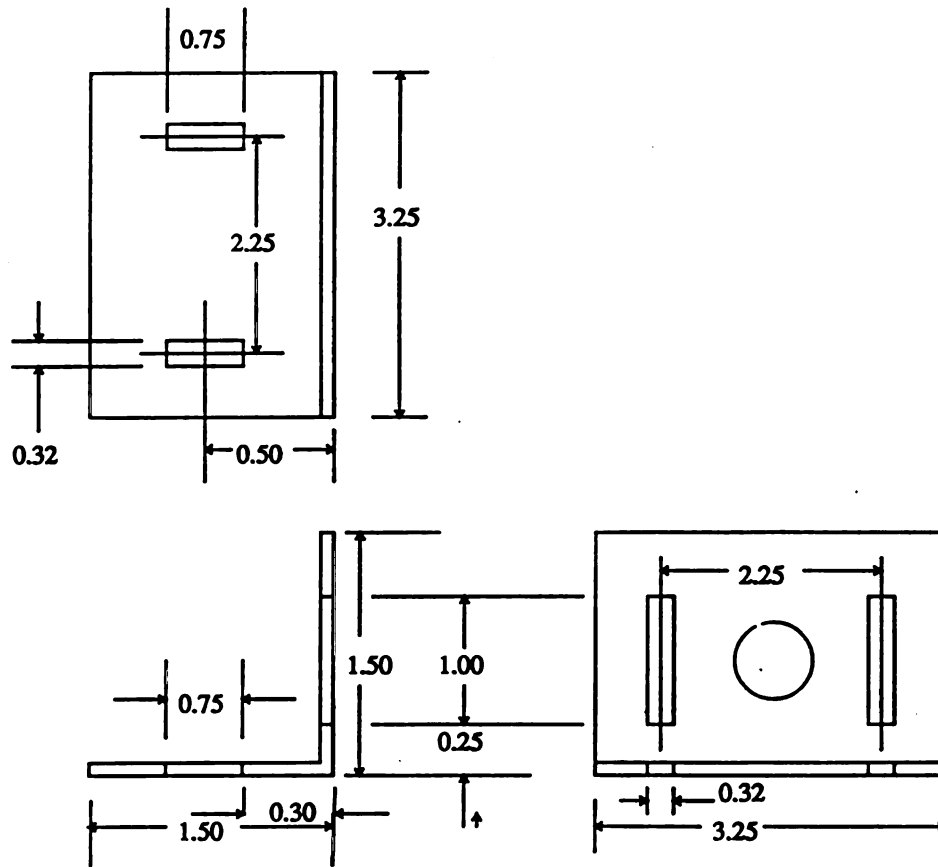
Angle iron to fasten top bearing blocks to bottom bearing blocks.
